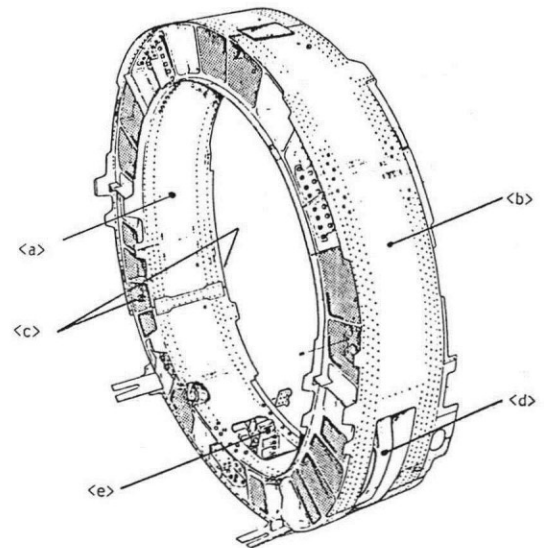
Main wing attachment assemblage. Principal parts are : <a> inner cover sheet, <b> outer cover sheet, <c> forward and aft frame forgings, <d> middle part and <e> rear engine attachment
